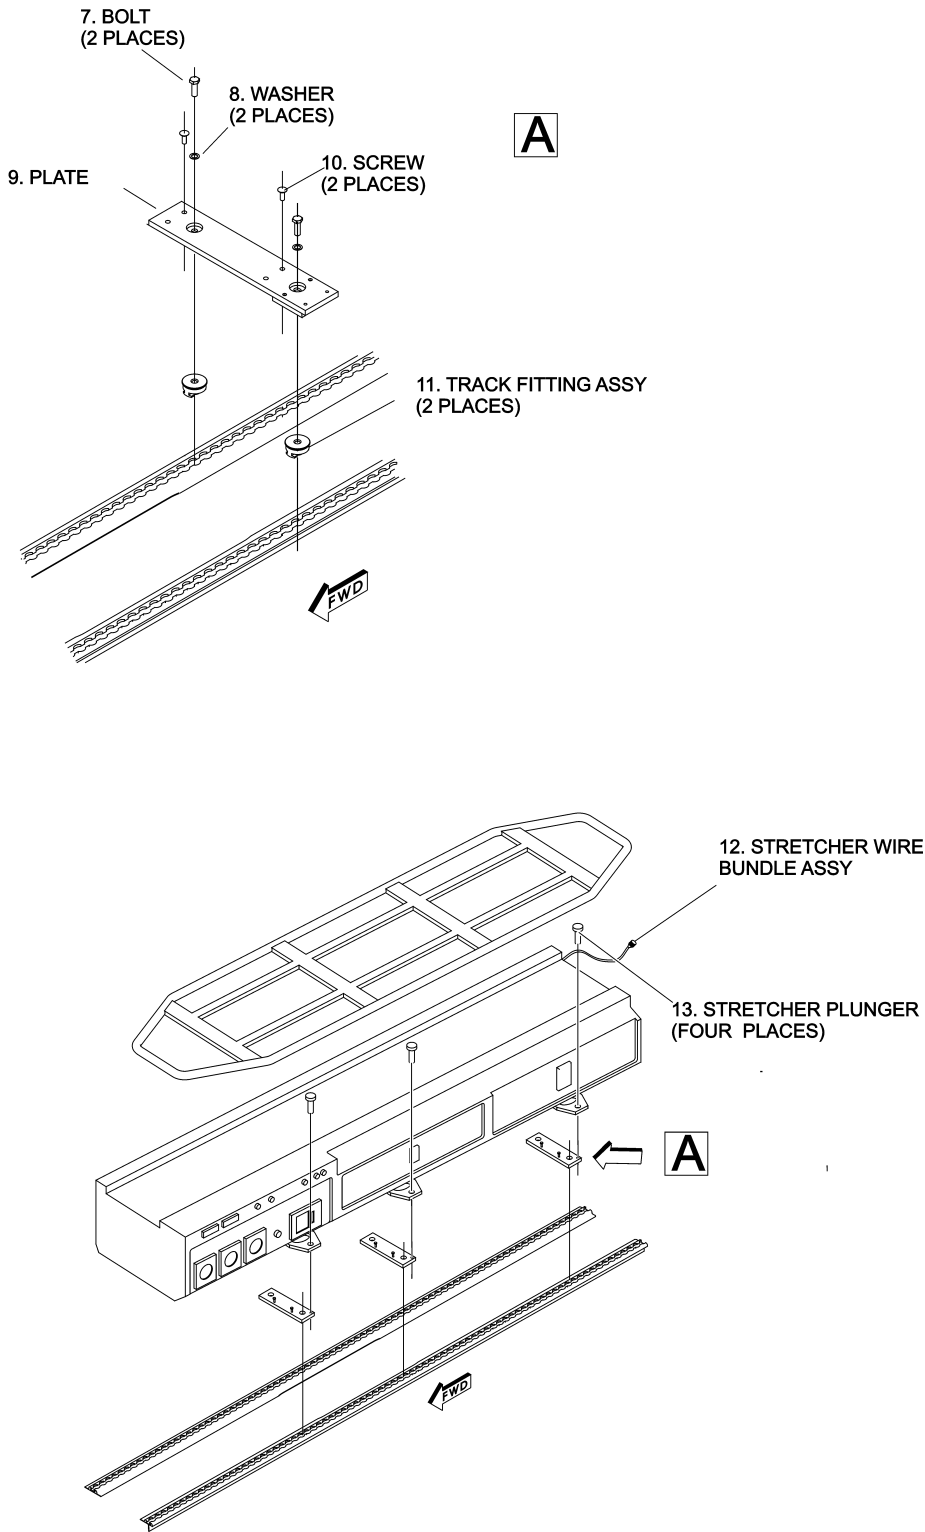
One Stretcher Conf. (NORDAM Corporate 1) - Removal / Instal. (Sheet 2 of 2)
